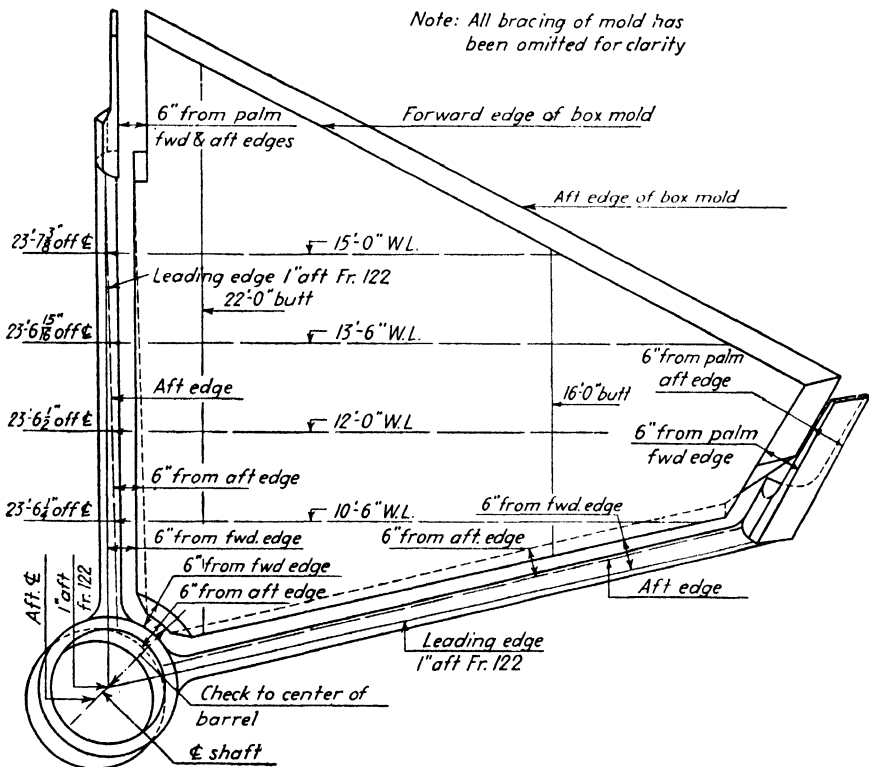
Box mold applied to welded and cast types of struts.
